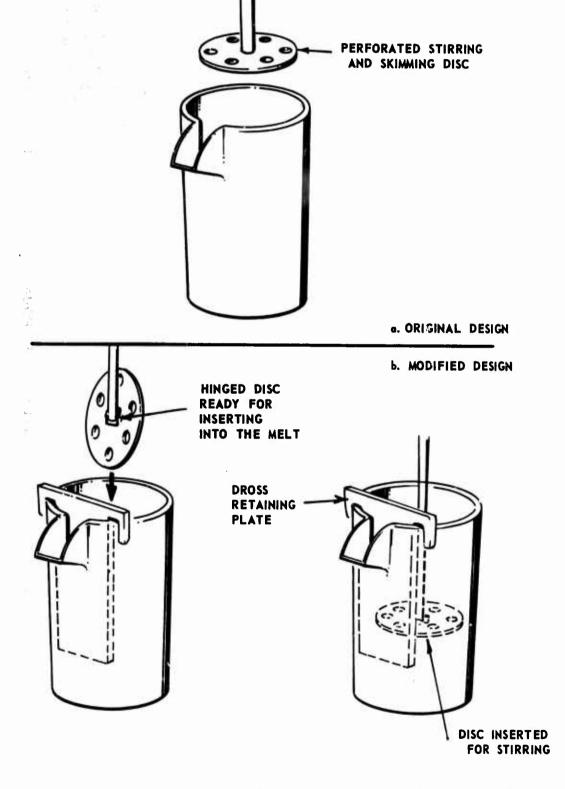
EQUIPMENT DESIGNS FOR STIRRING AND SKIMMING OF MOLTEN LA141 ALLOY HEATS
